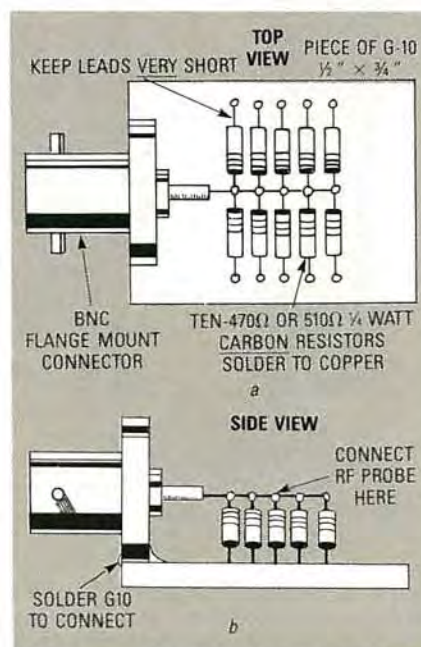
A DUMMY LOAD SHOULD BE USED while adjusting the power output.
